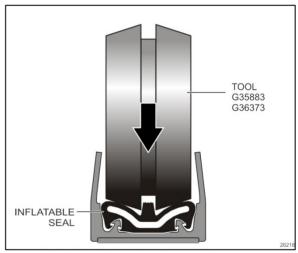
ROLLER TOOL (INFLATABLE SEAL)
